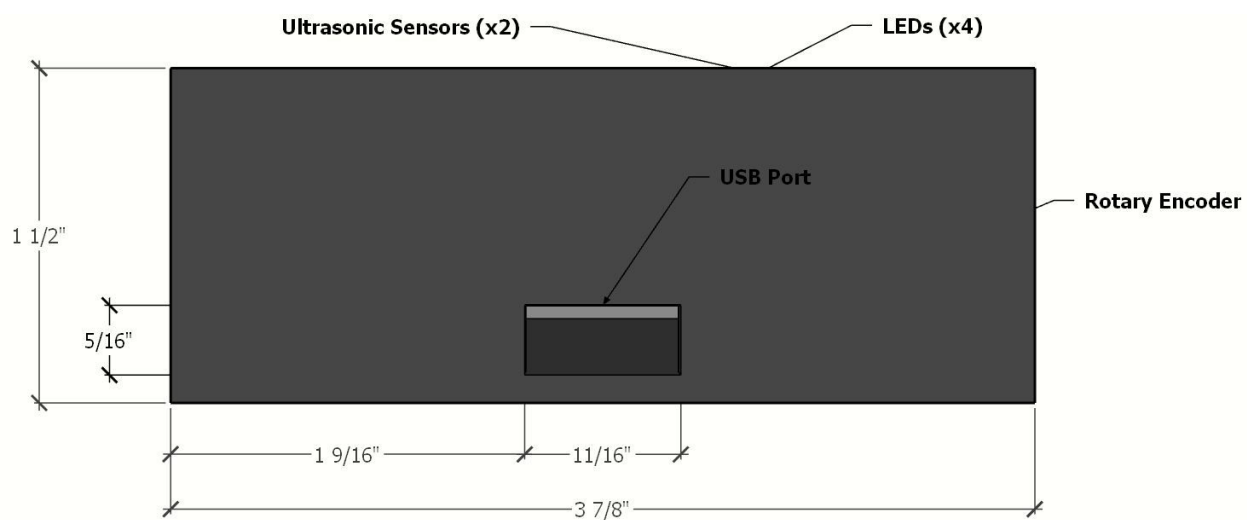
Back view of the PC Buttonpad outer shell with dimensions.
